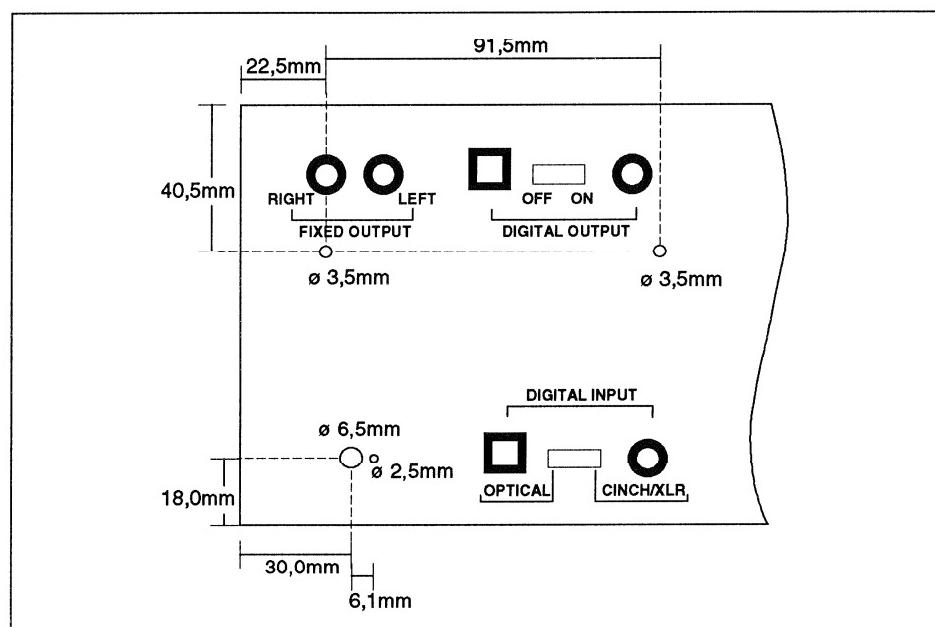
Mounting holes in the rear panel of the D740 and drill holes for the new switch.
